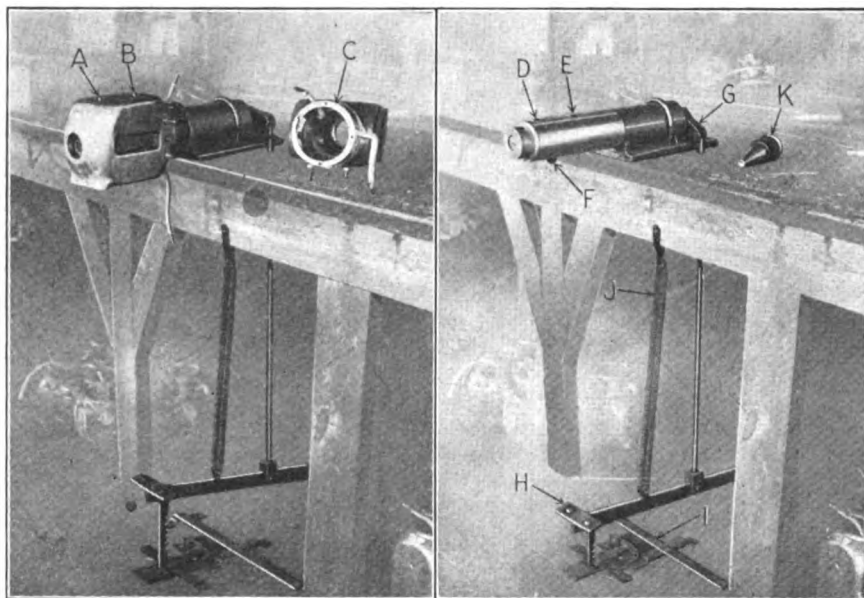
DETAILS OF JIGS USED FOR MACHINING PARTS OF A TALKING MACHINE
